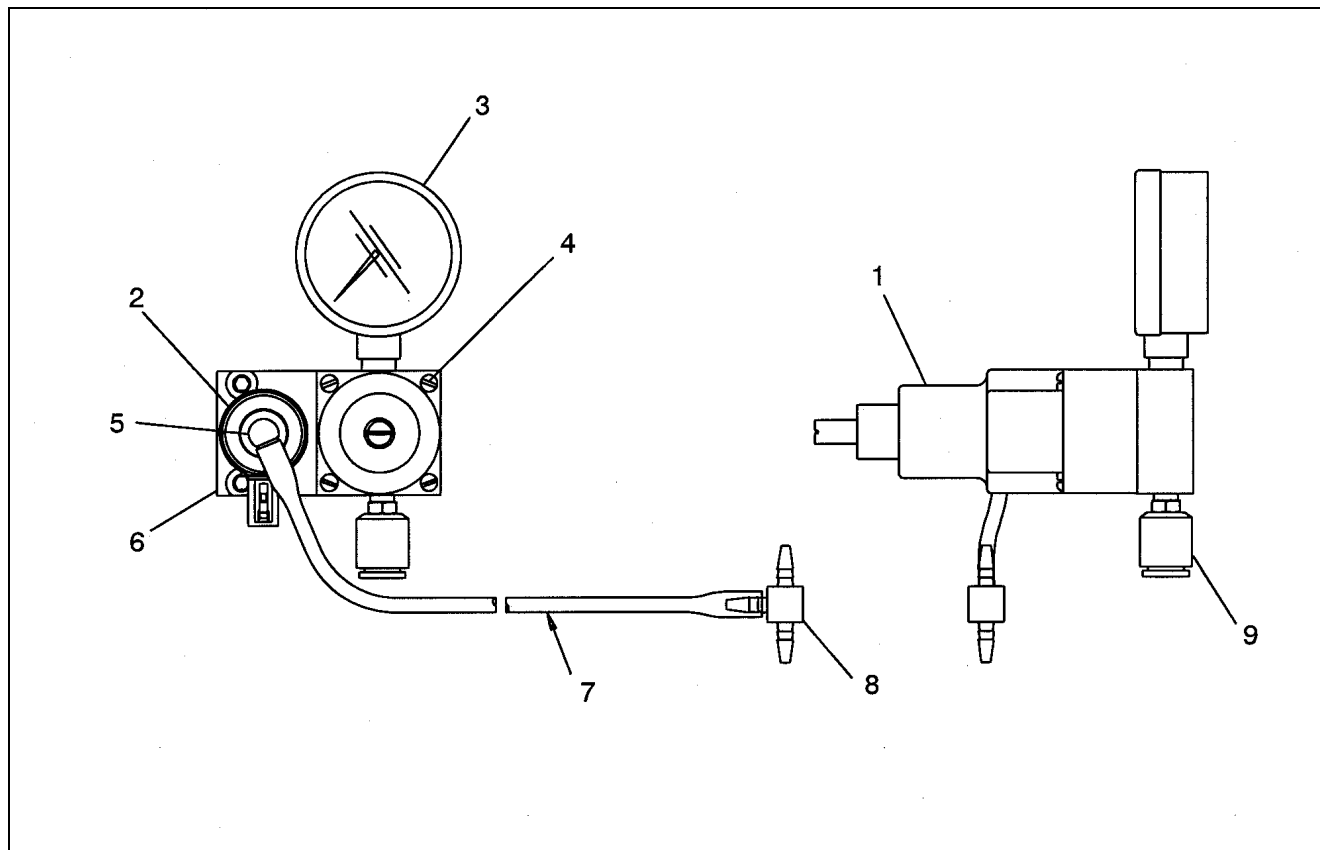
Ink Circulator Pump Assembly (SP374804) (Triumph Opaque Only)
